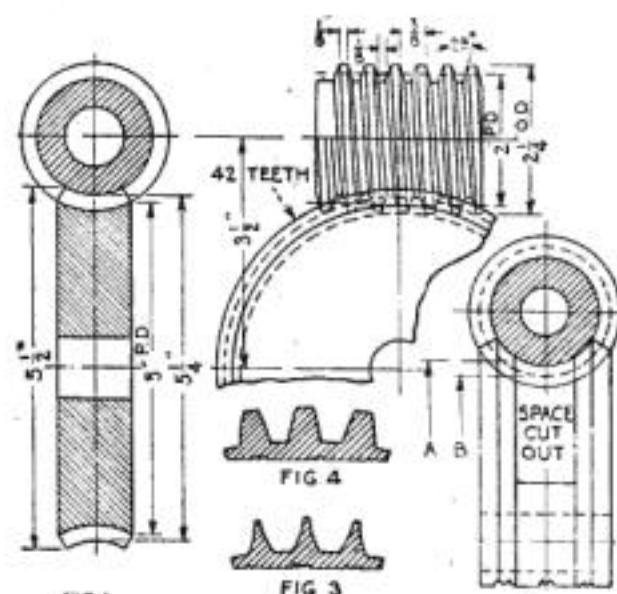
is the first worm gear Mr. Ellis designed, and Figs. 2, 3, and 4 illustrate the tricky grooved gear
